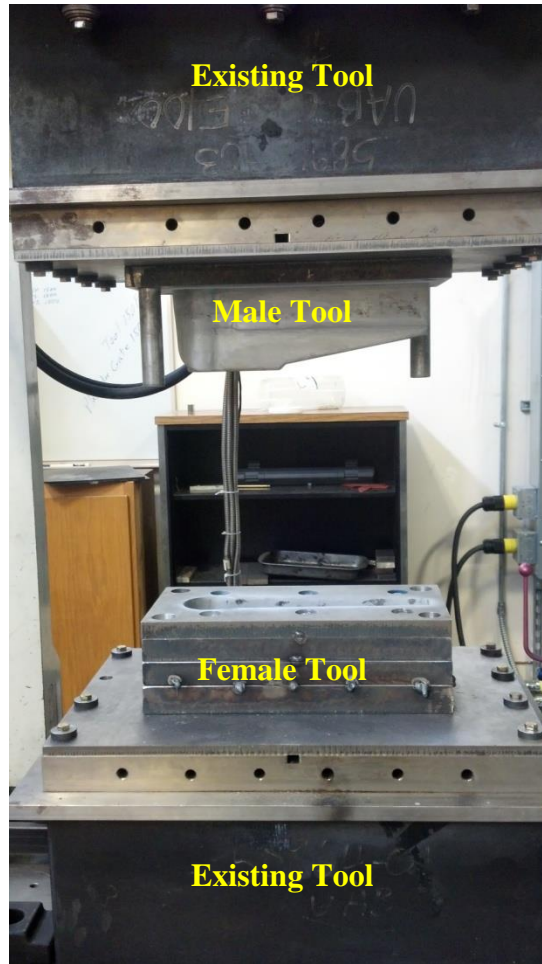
Male and female duct-screen cleaner tool bolted to an existing tool.
